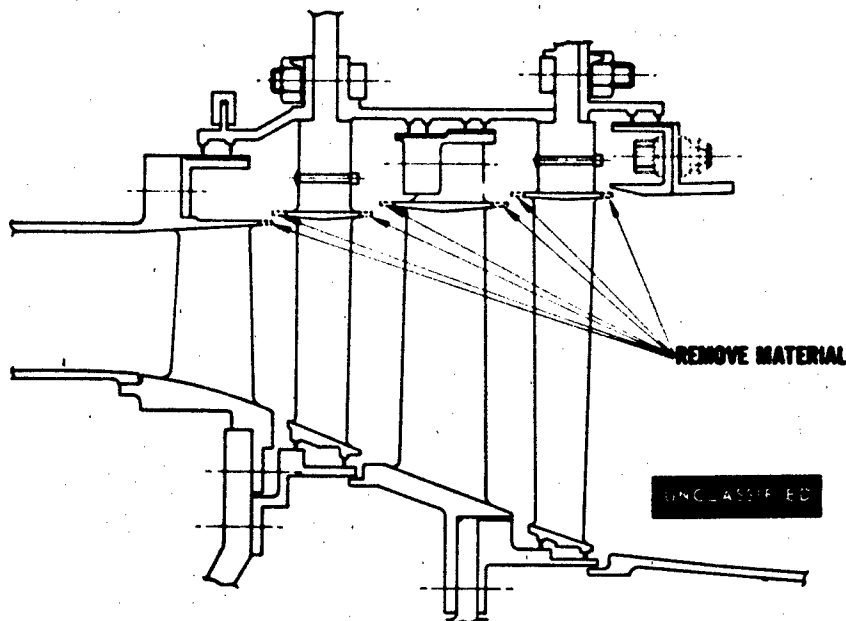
Test Configuration Build IV – Platforms Removed and No Filler
